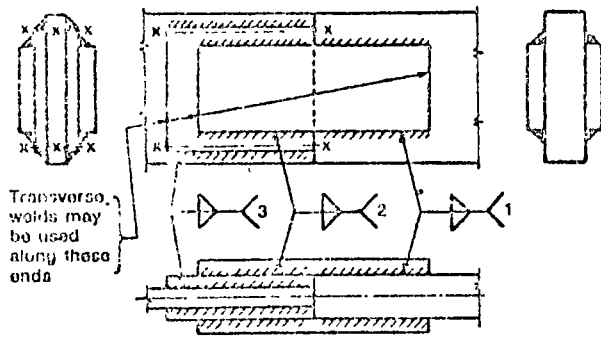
Fillers less than 1/4 in. thick.
